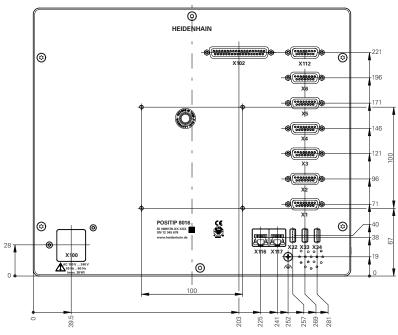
Dimensions of the rear panel for devices with ID 1089176-xx
